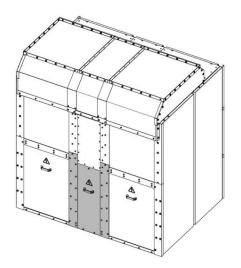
Contactor panels with panel width 435 mm only: Rear wall, 3-panel arrangement
